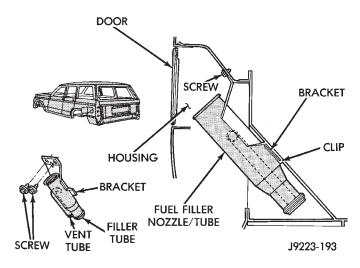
Fuel Filler Nozzle/Tube Removal/Installation—XJ Vehicles
